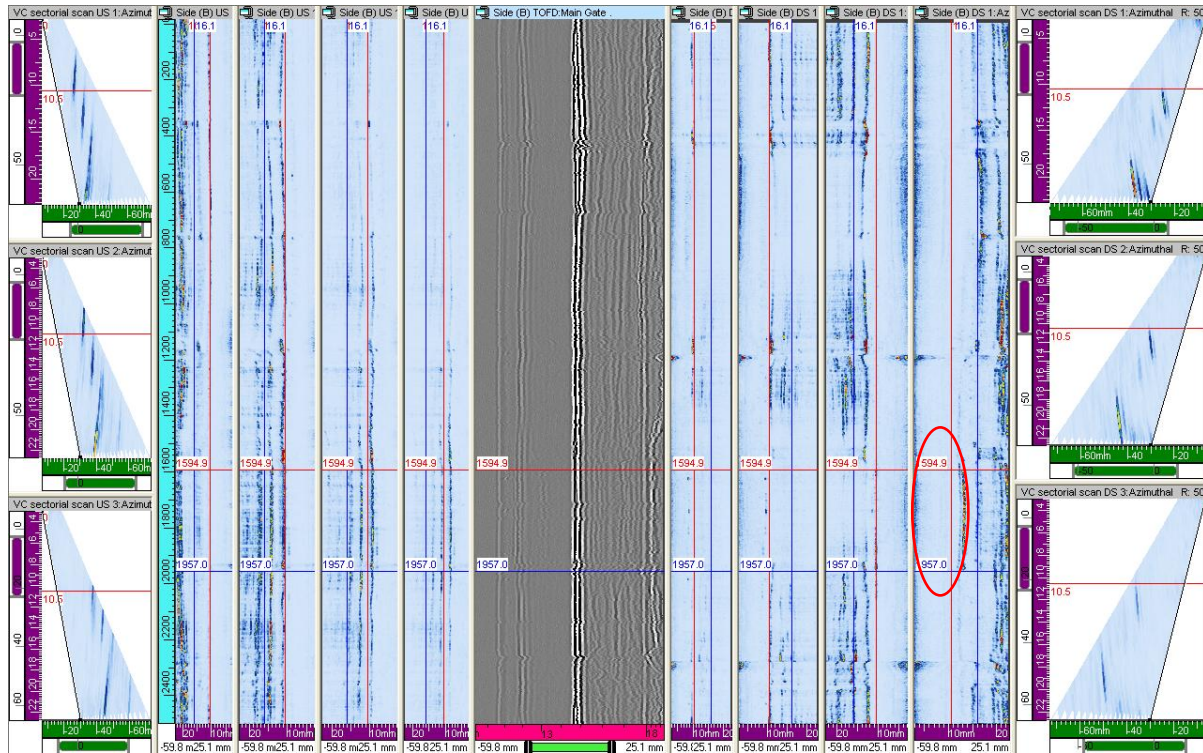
Weld MLA 4909 - EWI LPA Scan Screen Capture 1
